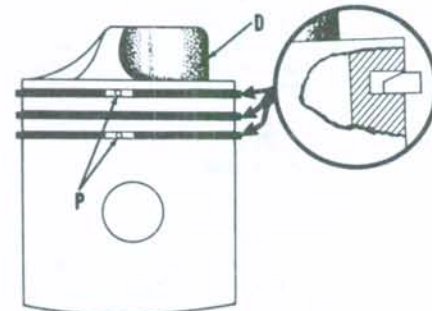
Cross sectional view of piston showing two of the three piston ring locating pins (P). The other pin is in opposite side of piston. Rings are installed with beveled inner edge (B) to the top. Deflector (D) directs the flow of incoming fuel charge for proper scavenging.
